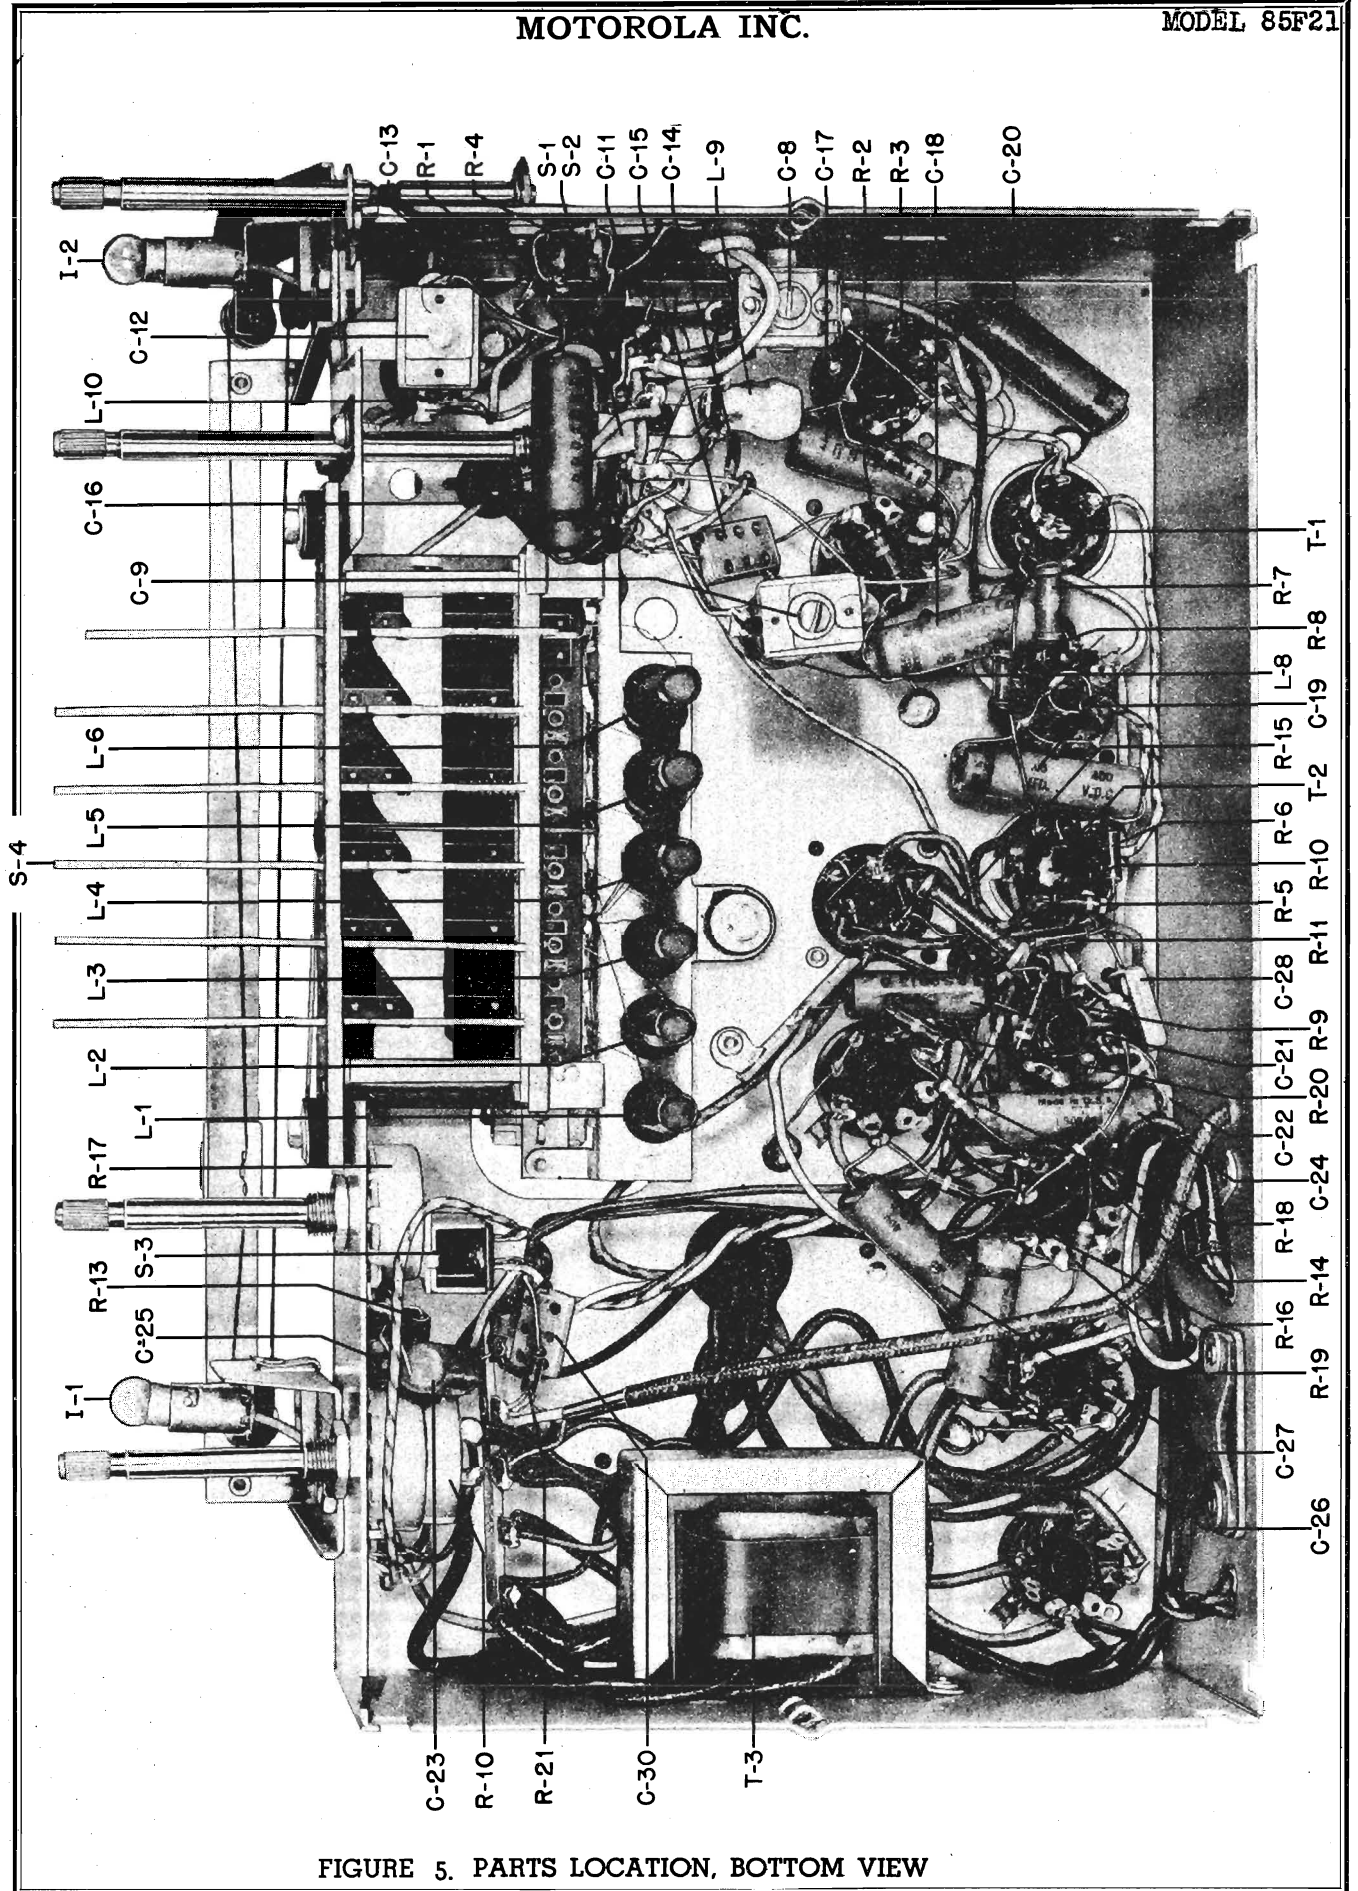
PARTS LOCATION, BOTTOM VIEW
